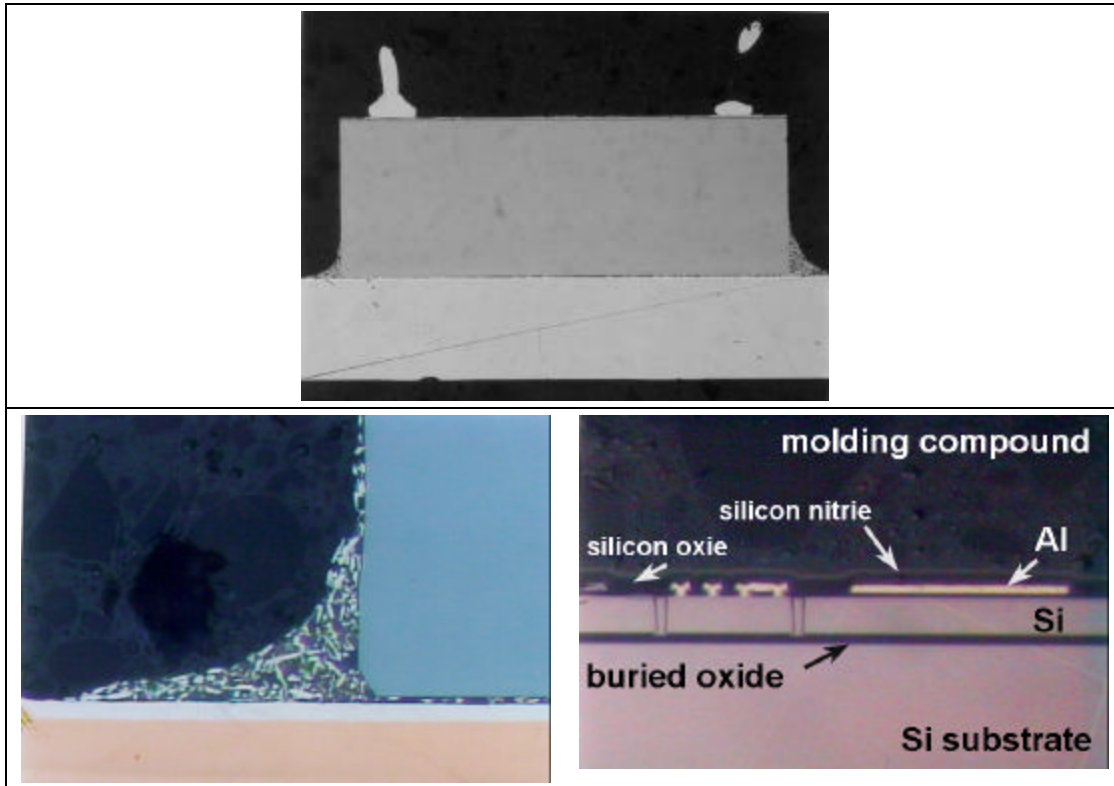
Die cross section (a) and close-up of the die attachment (b) and die surface (c).
